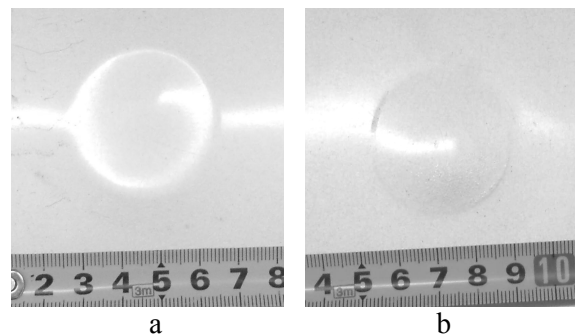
Experimental investigation with ISAS: a – after producing the dent; b – after removing the dent
